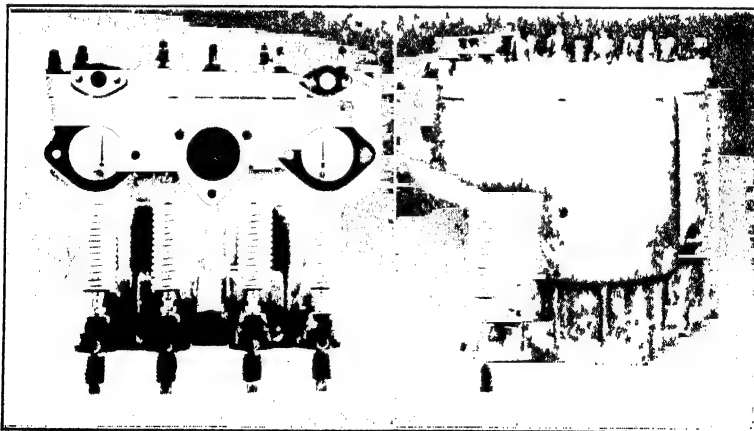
Aluminum Alloy Cylinder Casting of Early Thomas 150 Horsepower Airplane Engine was of the L Head Type and Had Hard Metal Liners Inserted to Take Piston Wear.
